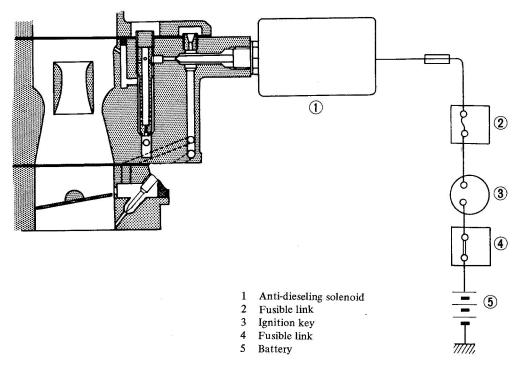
Schematic drawing of anti-dieseling solenoid
